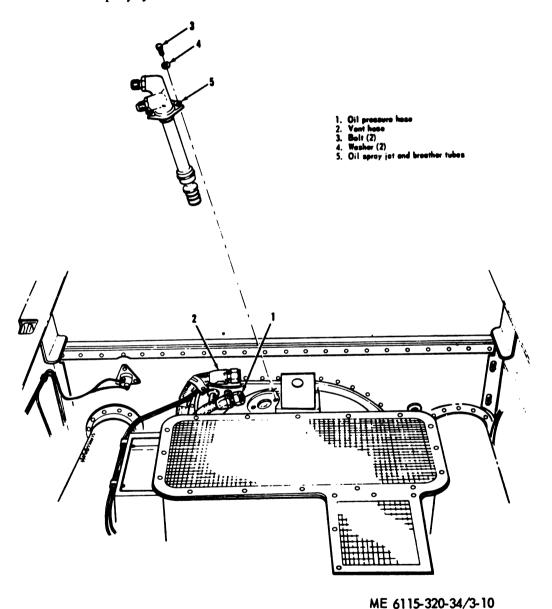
Oil spray jet and breather tubes removal and installation.
